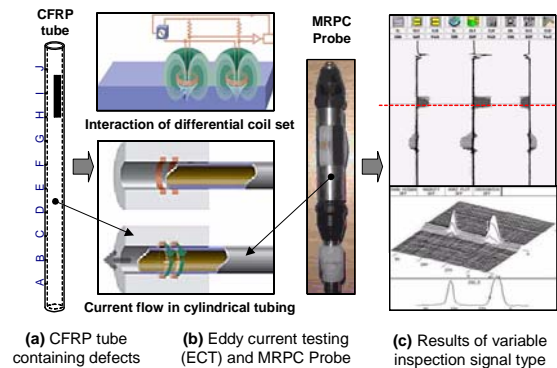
Schematic illustration of Eddy Current Testing (ECT) for CFRP tube specimen
